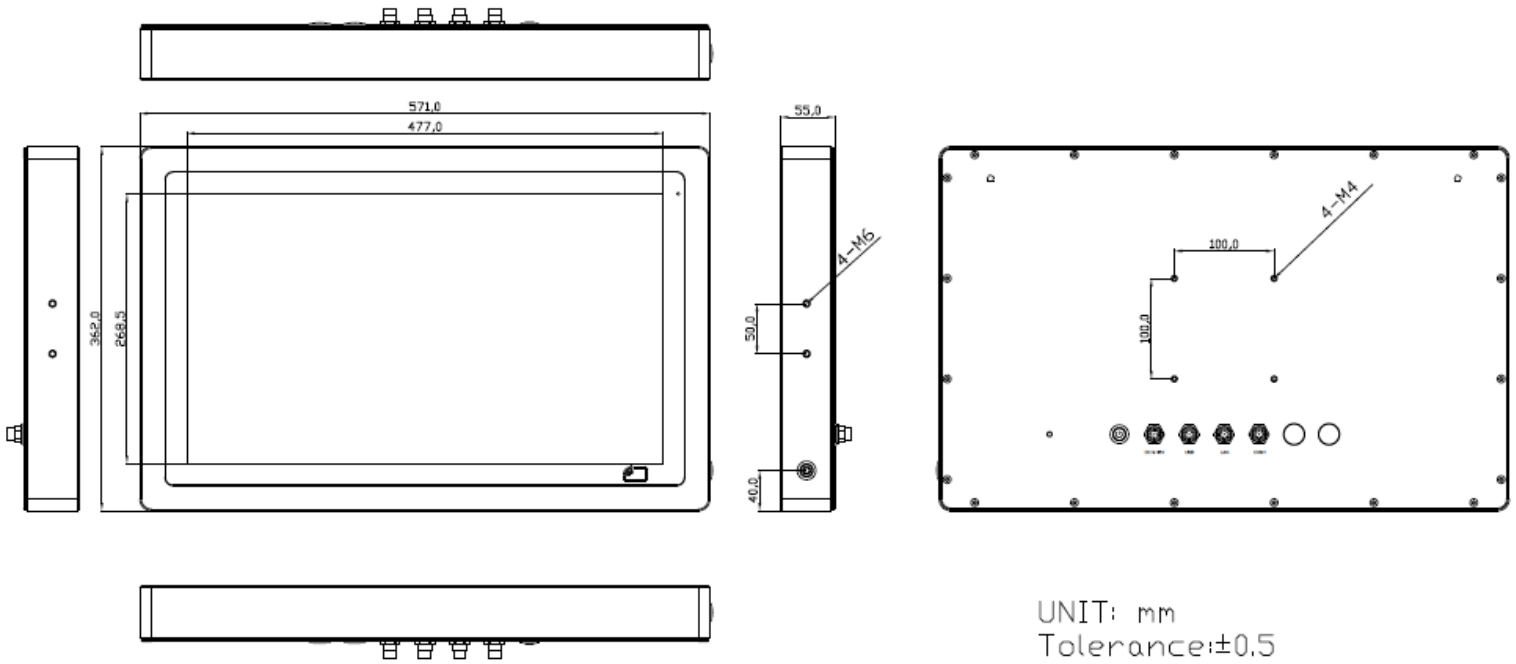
Dimensions of VITAM-916AP/R/G(H)
